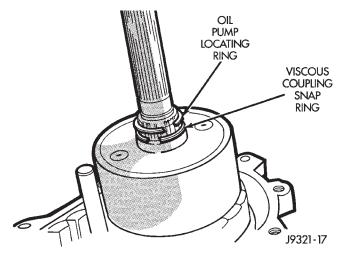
Viscous Coupling And Oil Pump Ring Installation
